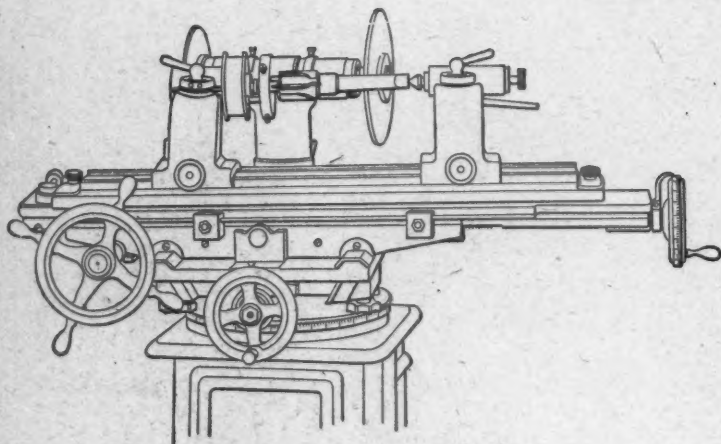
SIZING TAPER SHANK OF CUTTER.
